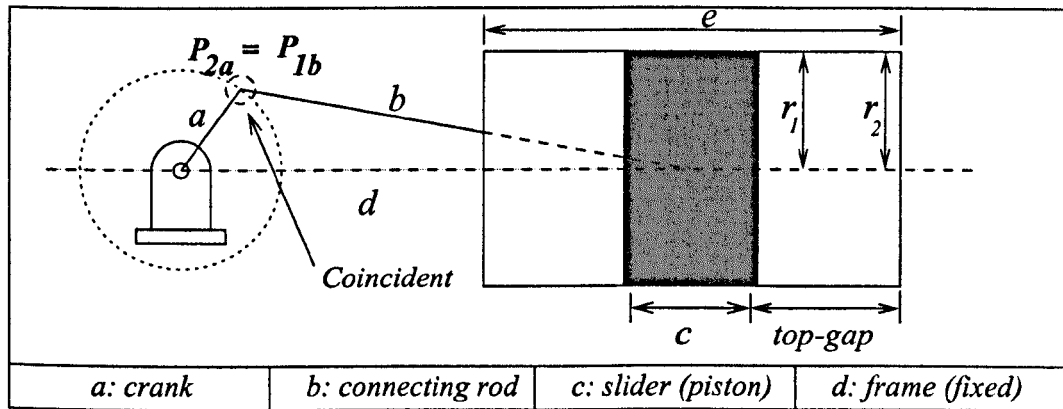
Internal-Combustion Engine (Slider-Crank Mechanism)
